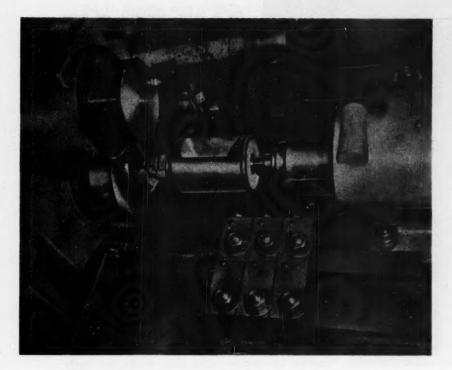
Close-up view of the tooling area on the automatic lathe shown in Fig. 6. The three carbide tools on the front slide turn the periphery of the valve plug.
